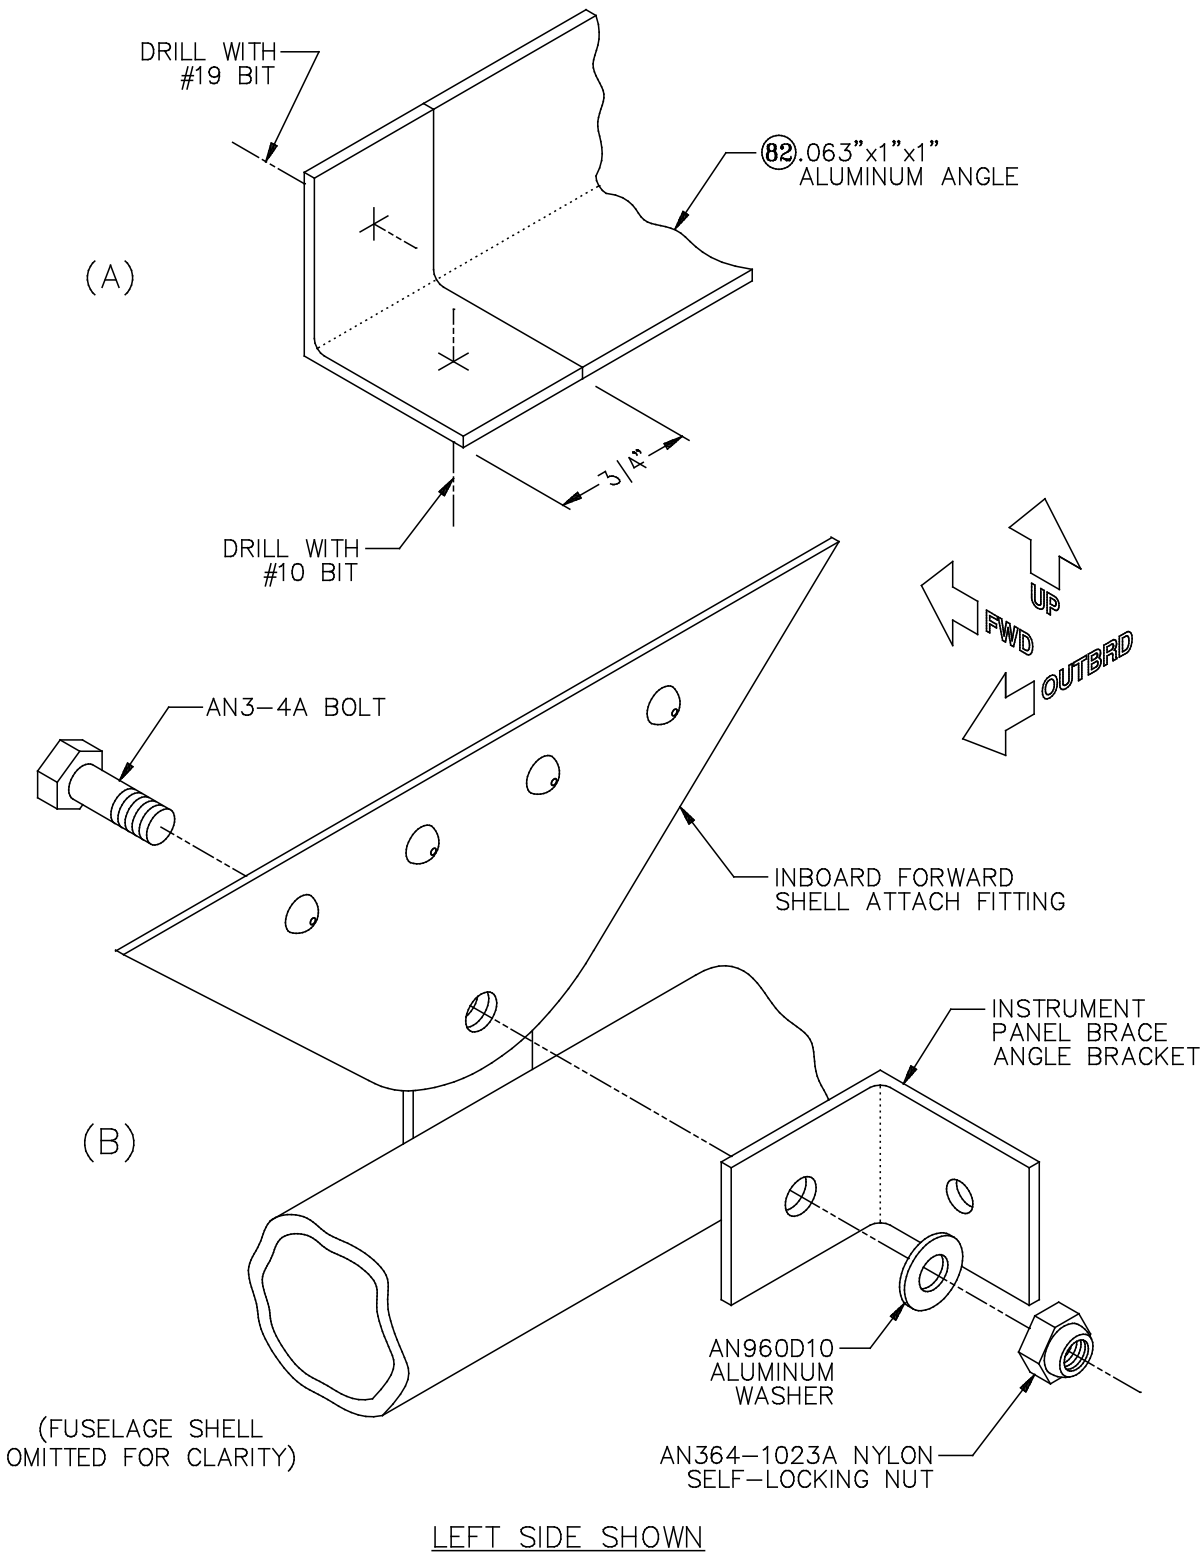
Fabricating and Installing the Instrument Panel Brace Angle Brackets
